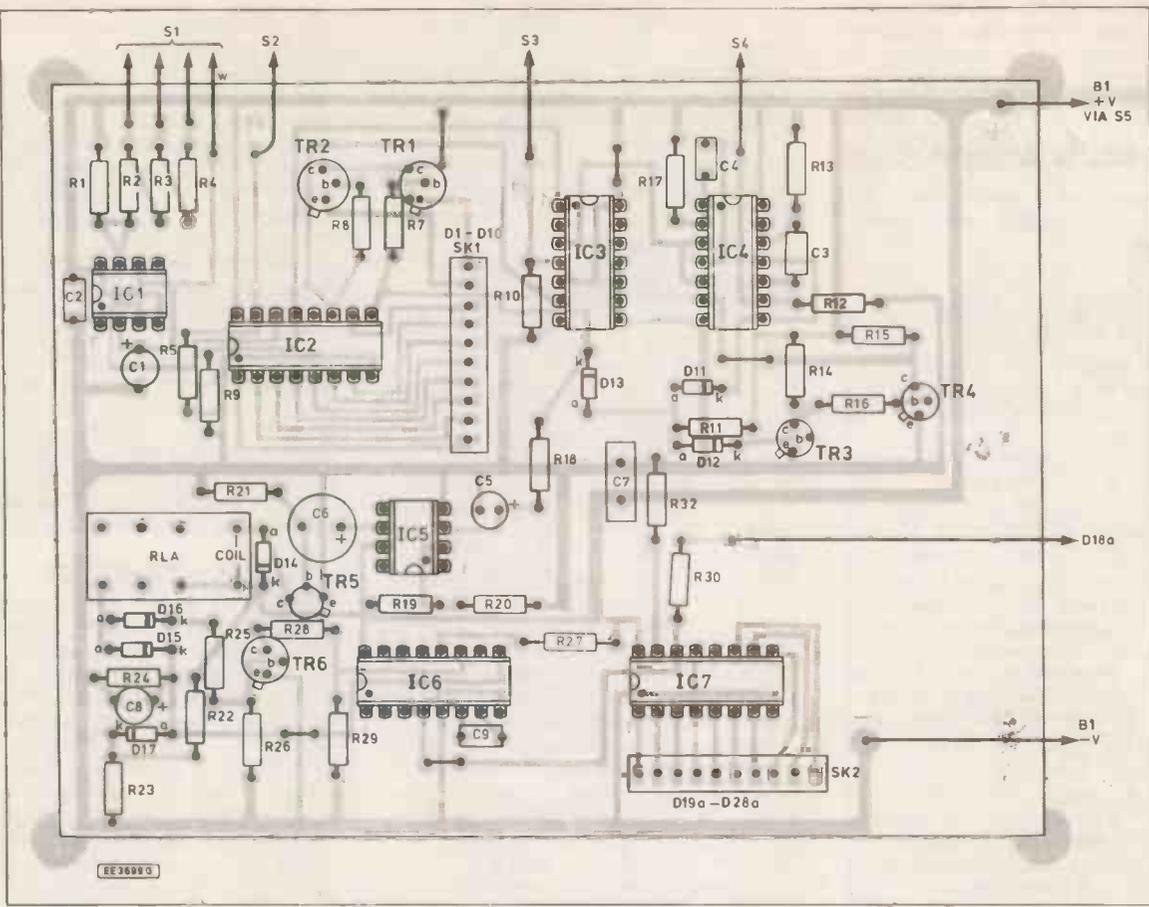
Printed circuit board component layout and full size copper foil master pattern for the Cricket Game.
